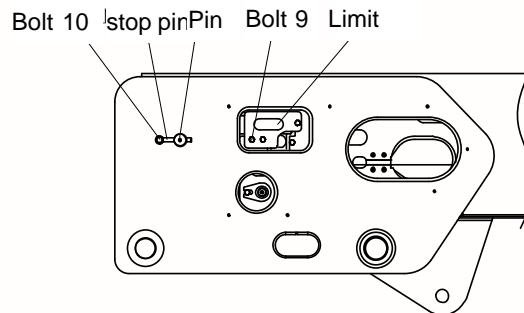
Disassembly of the pin of the telescopic cylinder
